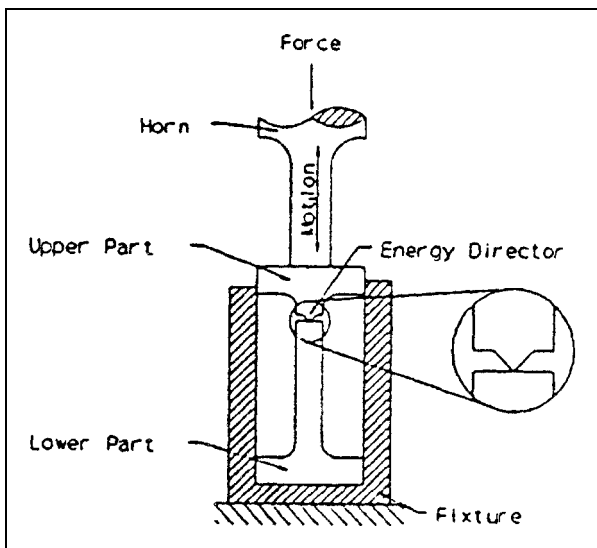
Ultrasonic welding using an energy director. The energy director is molded onto the upper part being joined. During welding, the horn is in contact with the upper part, and force is applied perpendicular to the axis of the weld interface. Vertical vibratory motion applied to the part results in heat generation and melting of the energy director.
